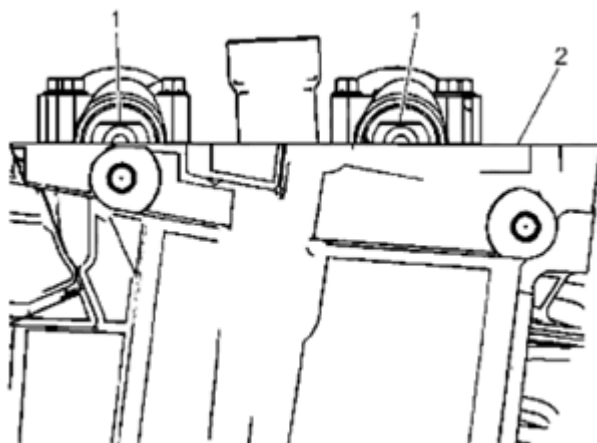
Aligning Match Marks On CMP Actuators
